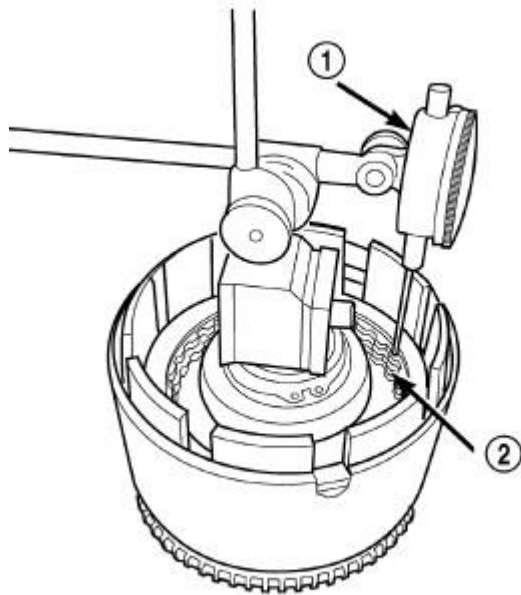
Input Clutch Assembly On Pressure Fixture Tool - 8391
